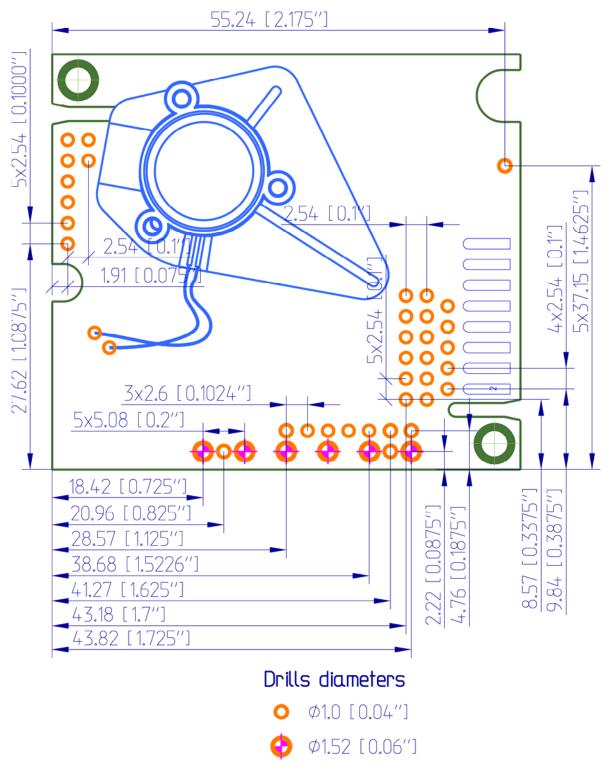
CO₂Engine[™] ICB mechanical drawing. Hole/contacts positions.
